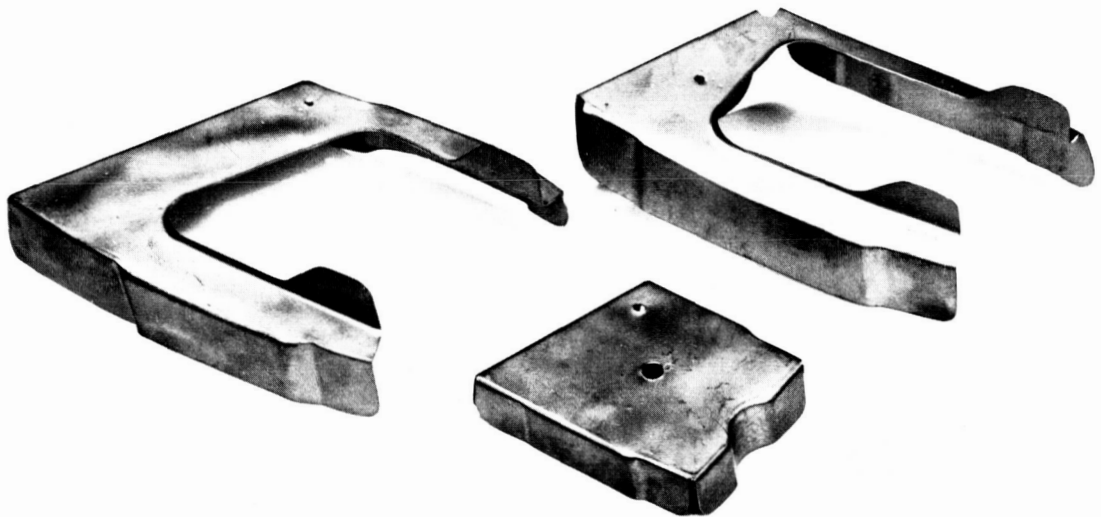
INCONEL X-750 PARTS, 0.025-INCH THICKNESS GAGES; TRAPPED RUBBER FORMED (REF. 29)
